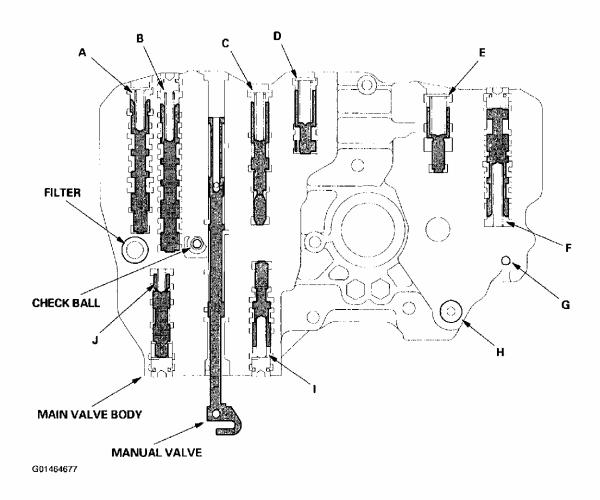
Sectional View Of Main Valve Body Courtesy of AMERICAN HONDA MOTOR CO., INC.
